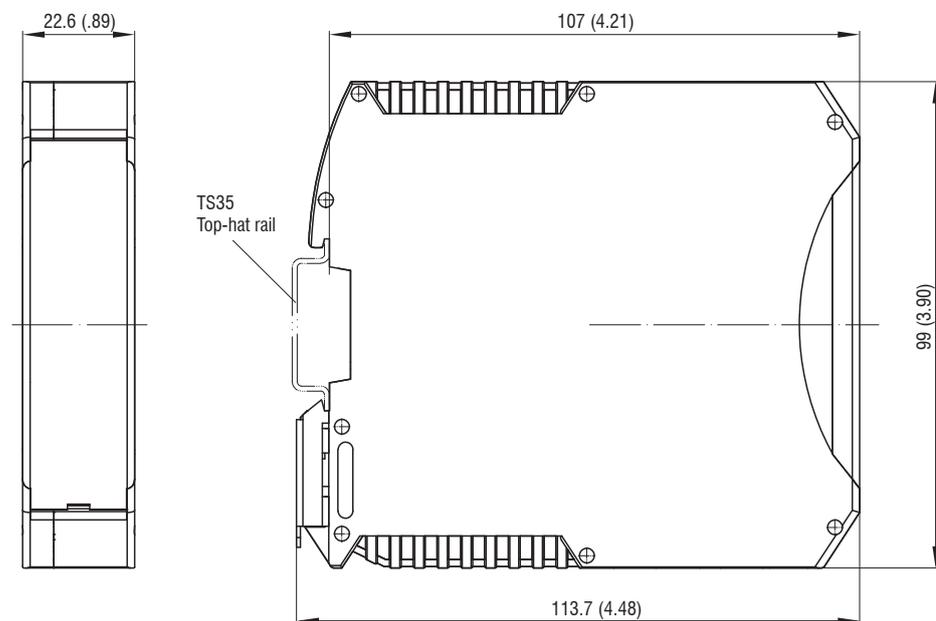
IF2035-EIP dimensional drawing, dimensions in mm
